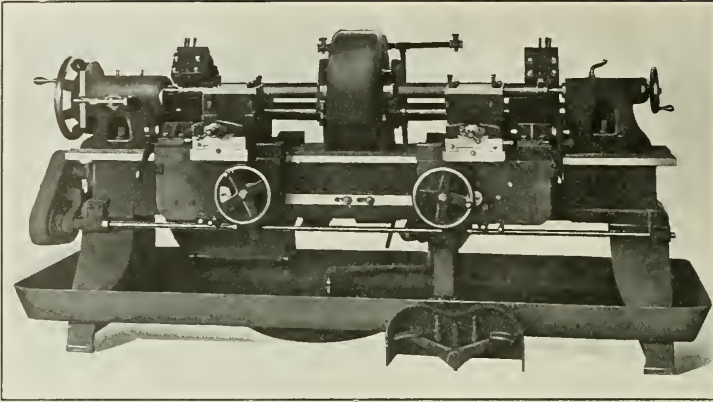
Short-head Center-drive Lathe of an Improved Type built by the Reed-Prentice Co.
